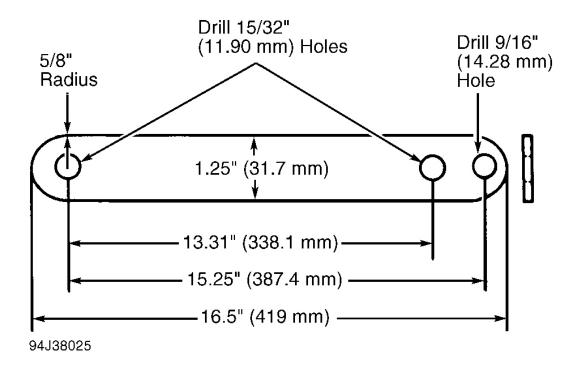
Fabricating Torque Converter Hub Seal Cup Retaining Strap Courtesy of CHRYSLER CORP.
